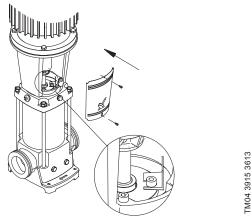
Adjusting fork storage CR, CRN 32, 45, 64, 90, 120, and 150
